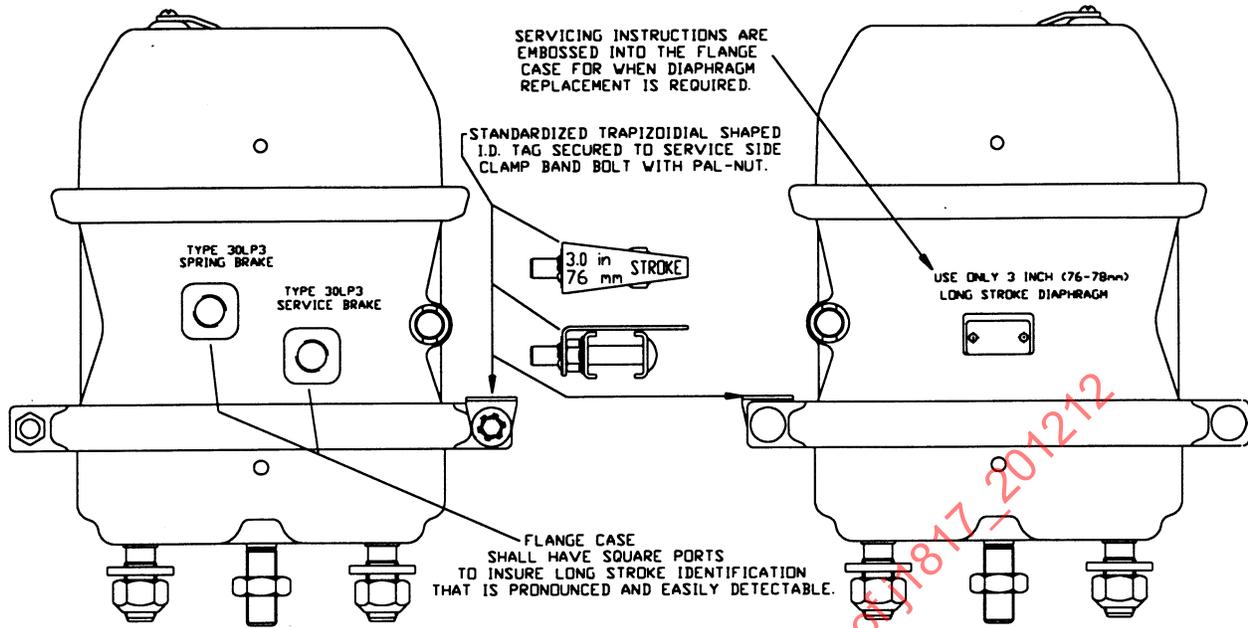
76.2 mm (3.00 in) LONG-STROKE SPRING BRAKE CHAMBER IDENTIFICATION
